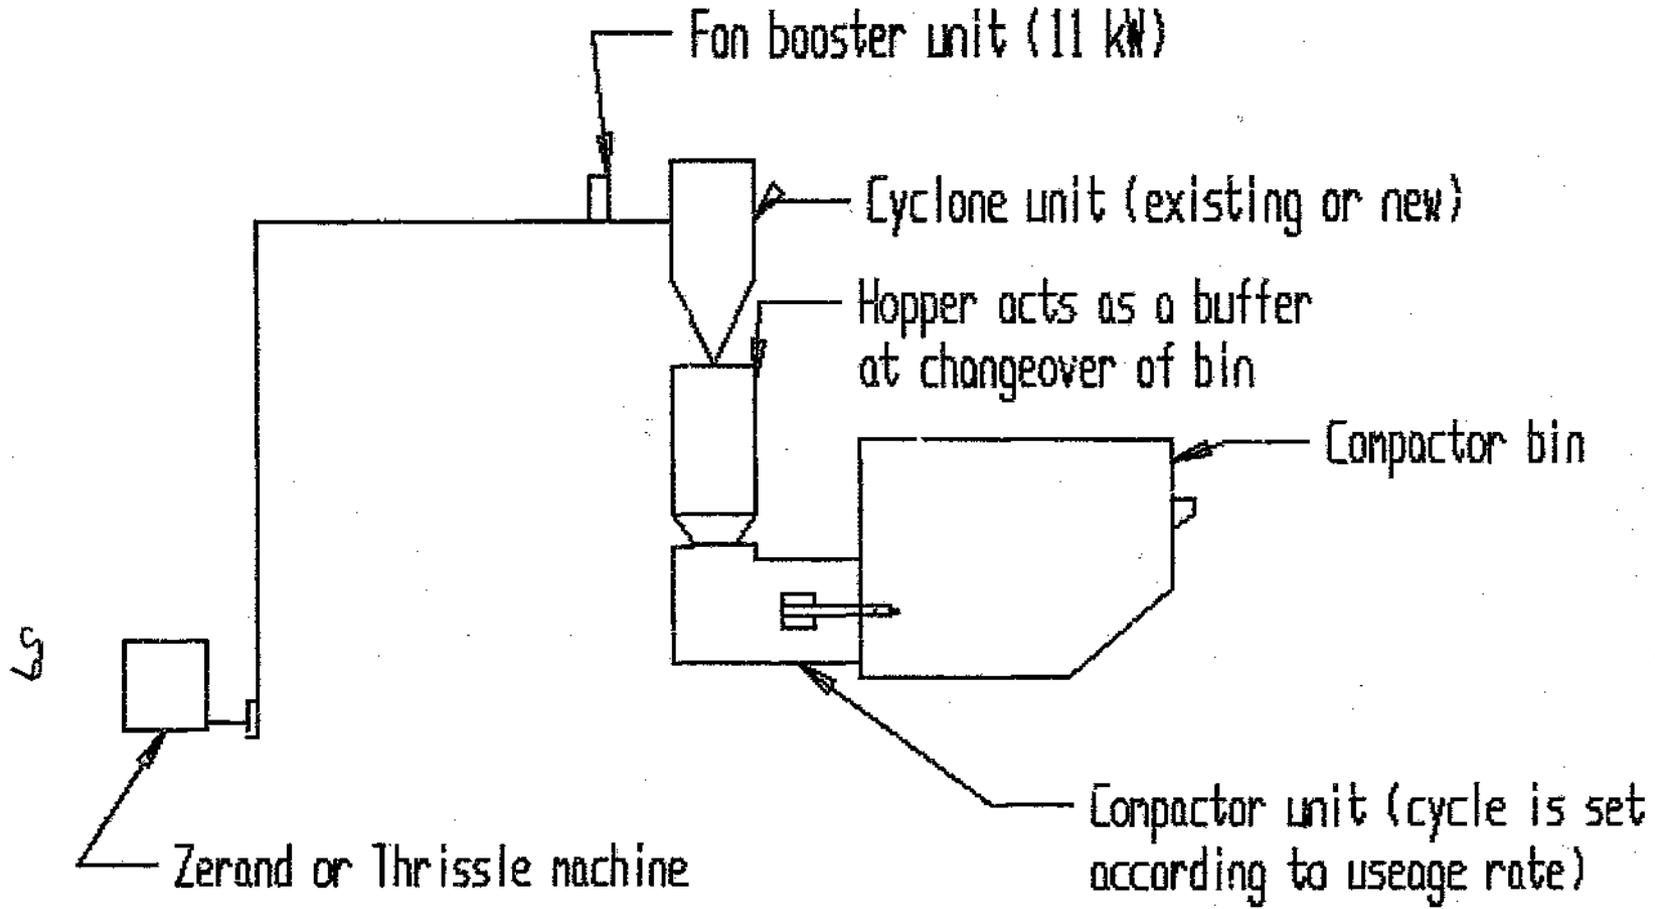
Compactor used on Zerand and Thrissle machines
